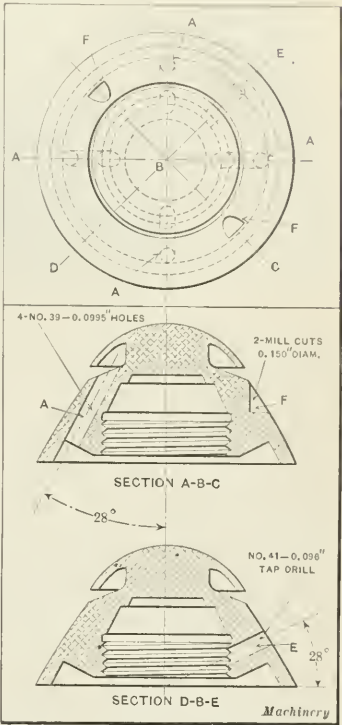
Aluminum Closing Cap used on Shrapnel Fuse
